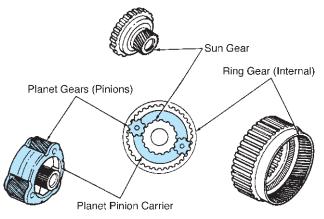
A planetary gear set is a combination of an internal ring gear, a sun gear, and a planet carrier with two or more planet pinion gears. *(Courtesy of Ford Motor Company.)
